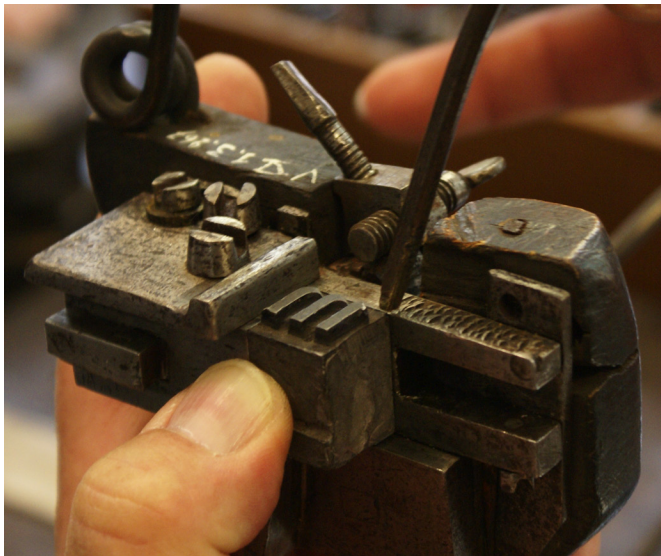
Half of a mould that contains an adjustable stool in the form of a bolt.
